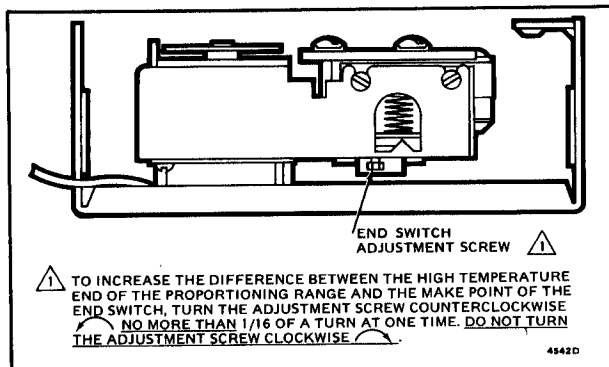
ADJUSTING THE END SWITCH “MAKE” POINT.
